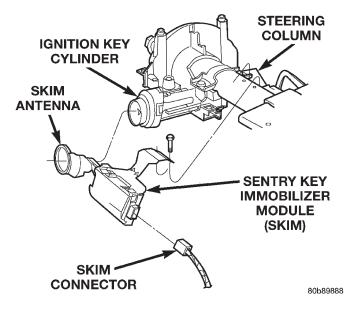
Sentry Key Immobilizer Module (SKIM) Remove / Install
